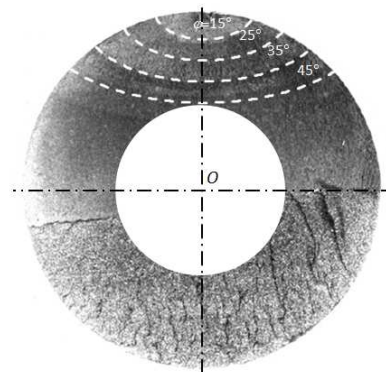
Results of crack model placed on a fractograph of a fractured railway axle
